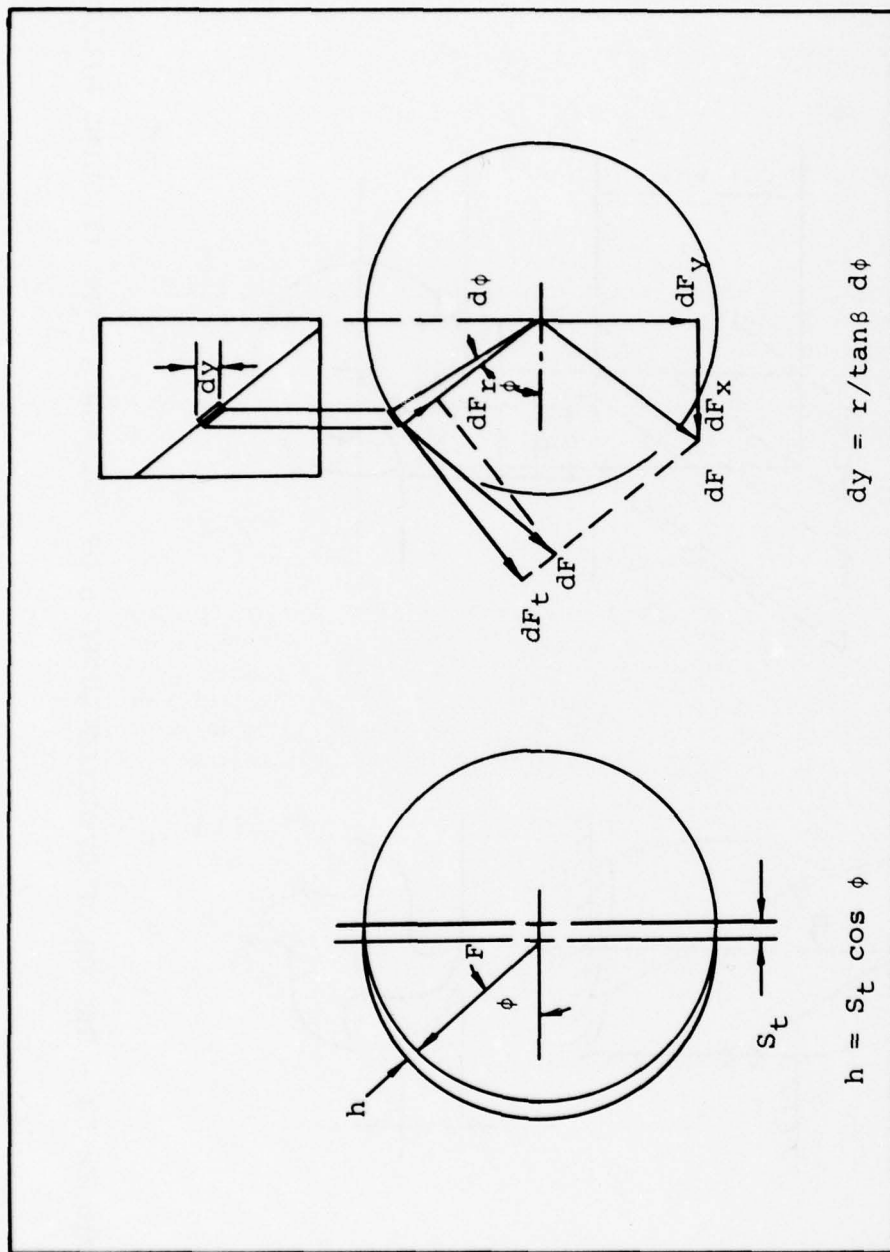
SKETCH OF CHIP THICKNESS AND FORCE COMPONENTS WHEN CLIMB MILLING
